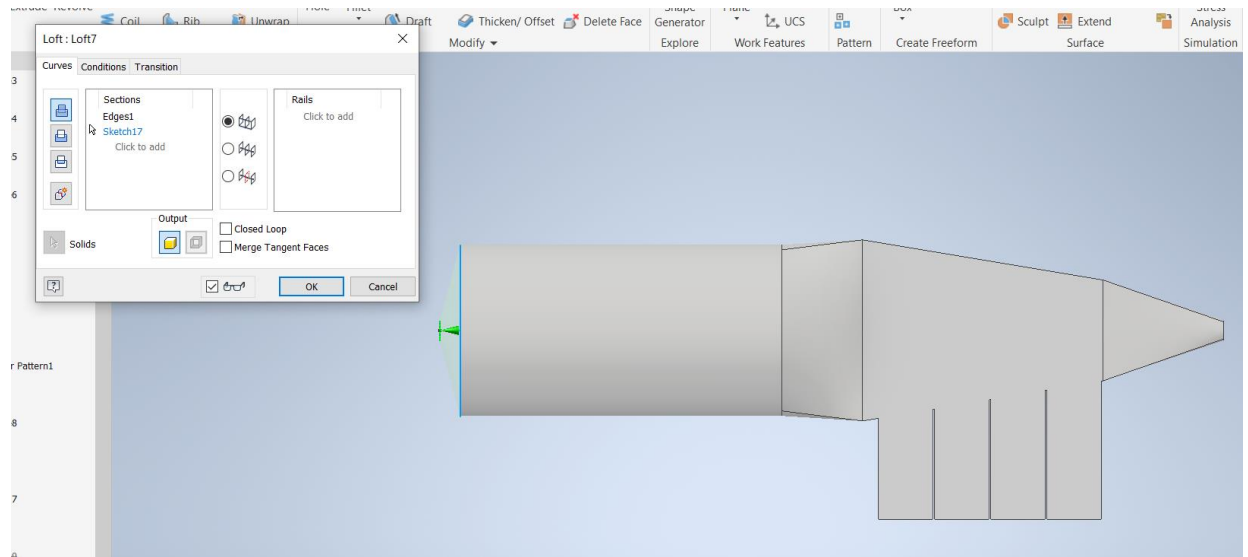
Completing the nozzle-transition piece for the Air outlet
